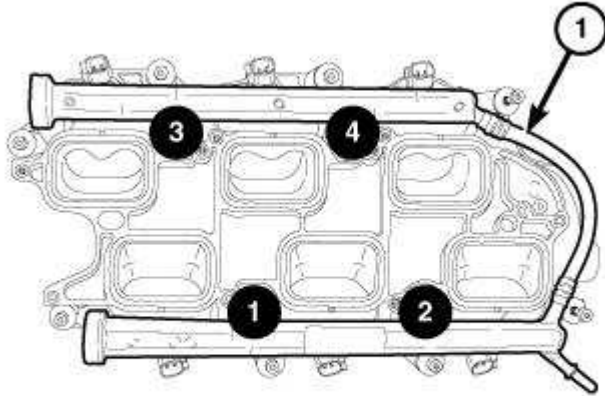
Lower Intake Manifold To Cylinder Head Seals
